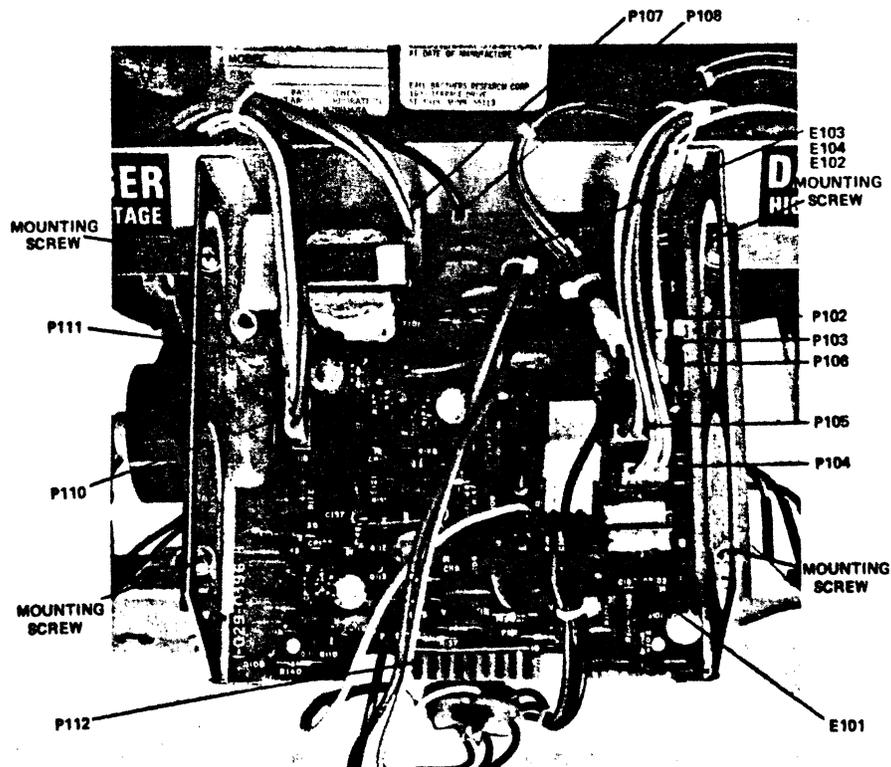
Monitor Deflection Board interconnections and mounting screws.
